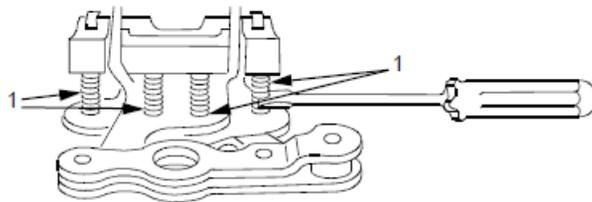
Retaining Ring, Feed Pawl Assembly, Feed Pawl Pivot Post.
